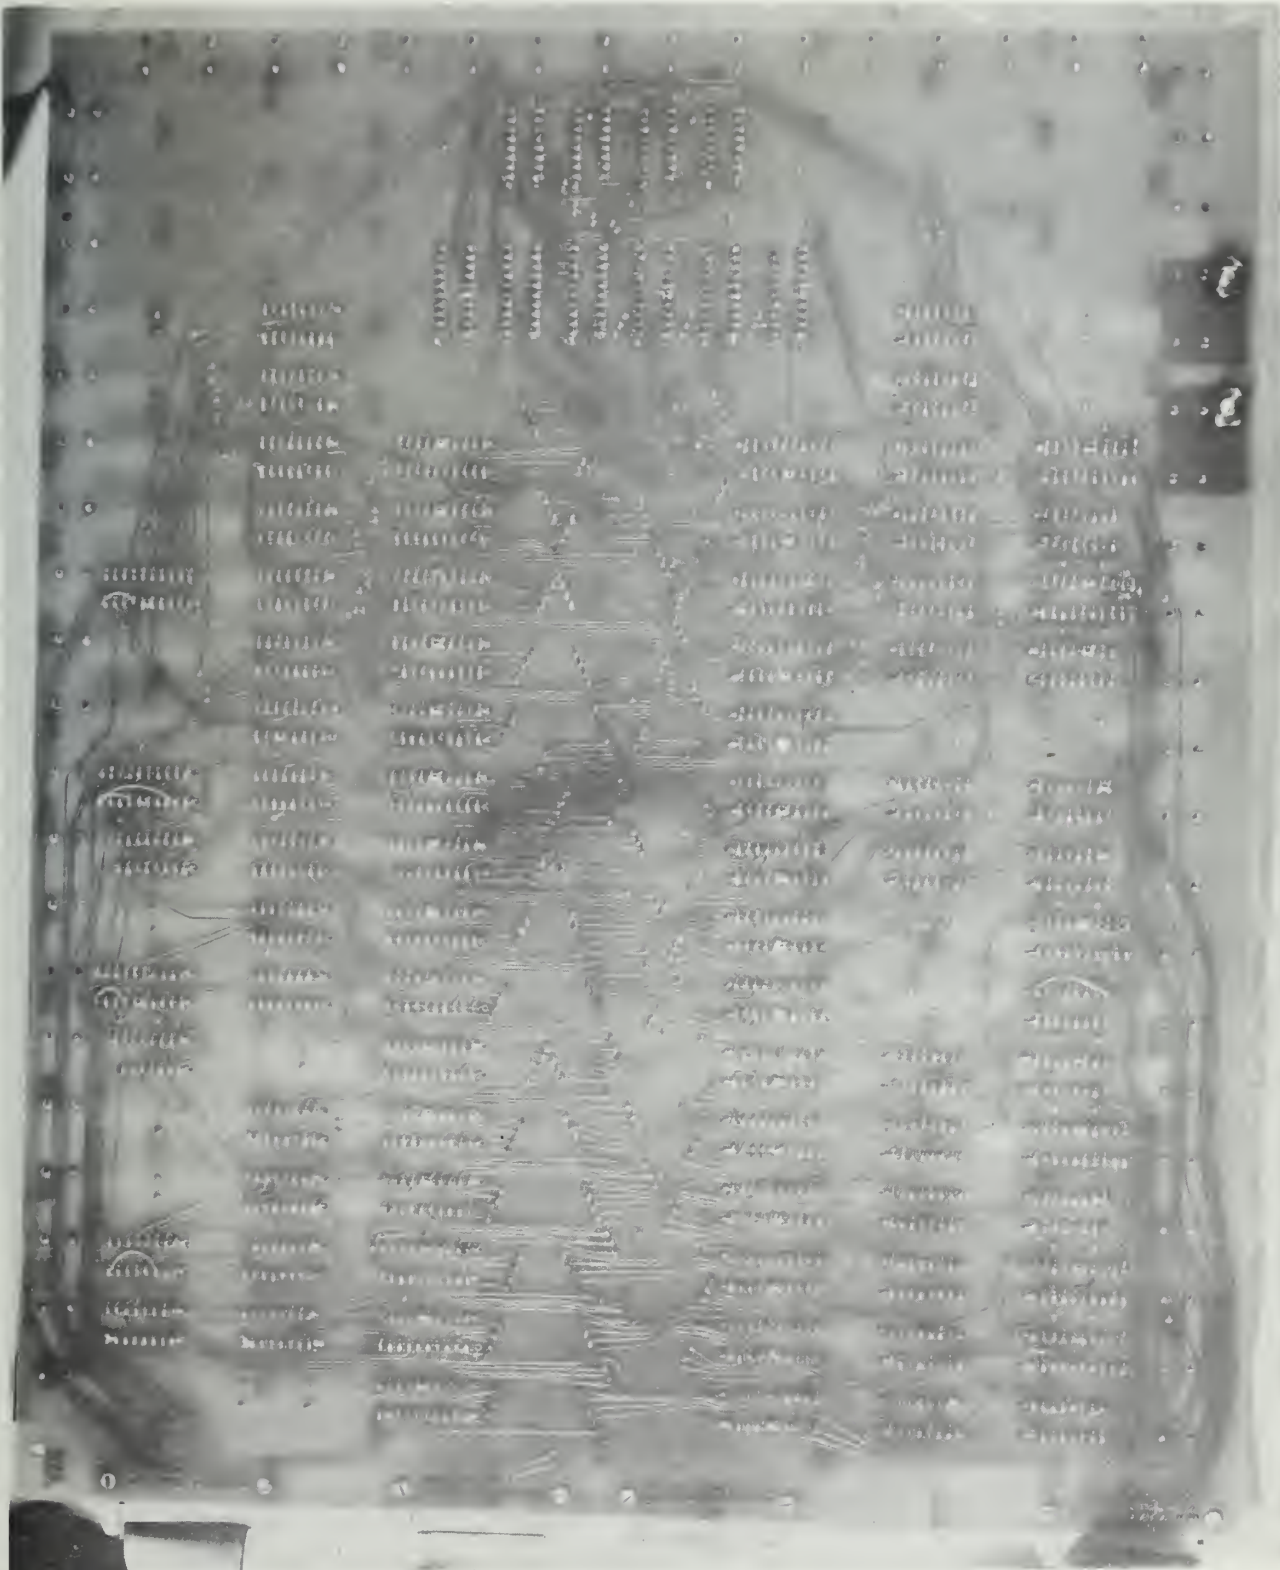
Photograph of Multiplier Prototype; Solder Side
